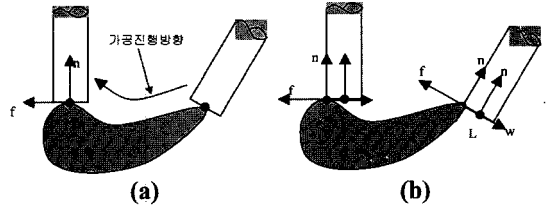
Cutter location for 5-axis flat-end cutter (heel angle = 0).
